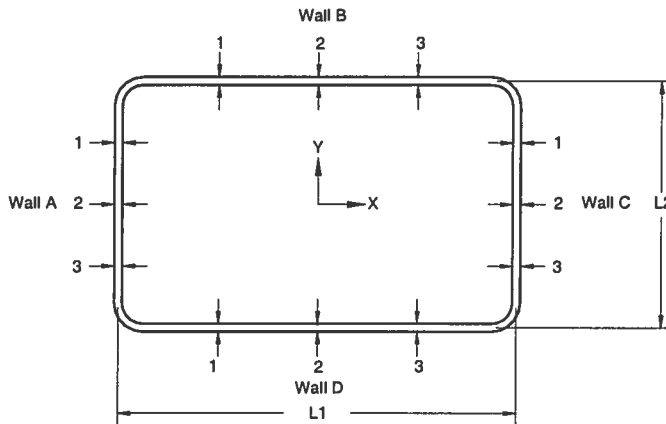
Details of dimensions taken for measurement on a laser consolidated rectangular cutting pattern.
